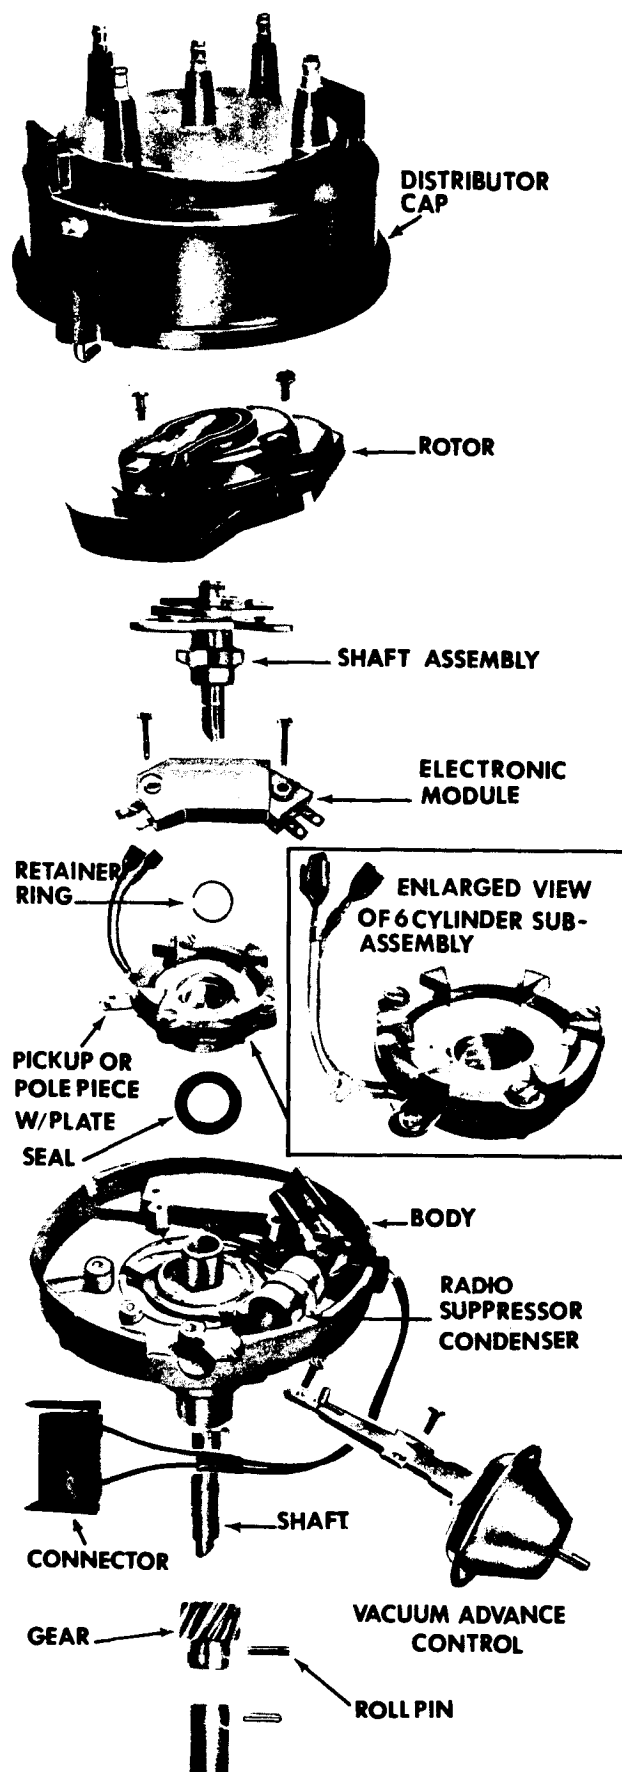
DISTRIBUTOR BODY ASSEMBLY, EXPLODED VIEW
